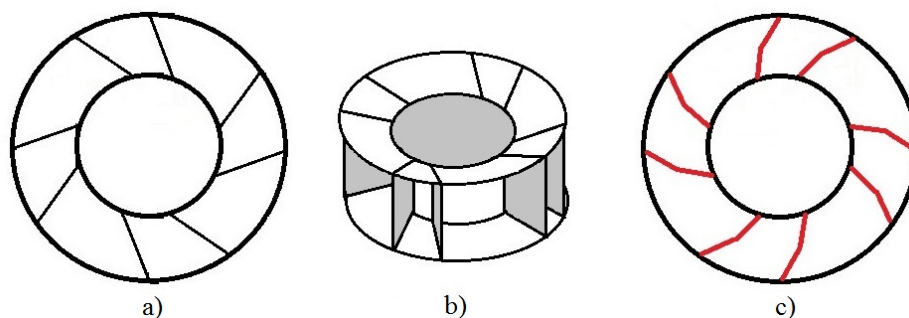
(a) Top view of original ODGV (b) isometric view of ODGV (c) a special designed of ODGV
